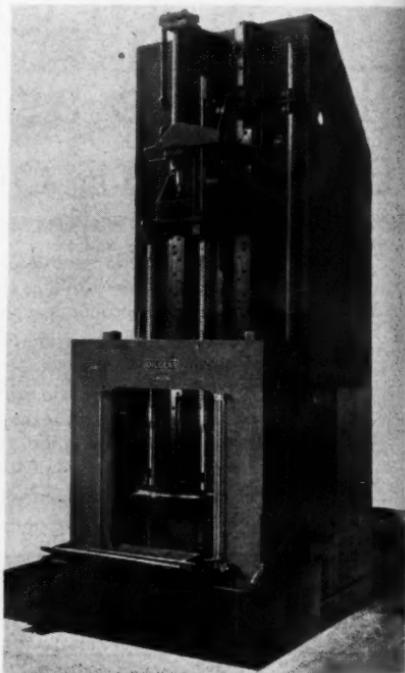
Oilgear Type XM-80 Cyclematic Broaching Machine
